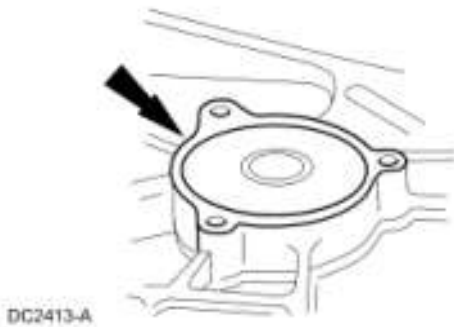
Applying Bead Of Sealant To Motor Mounting Surface On Case
